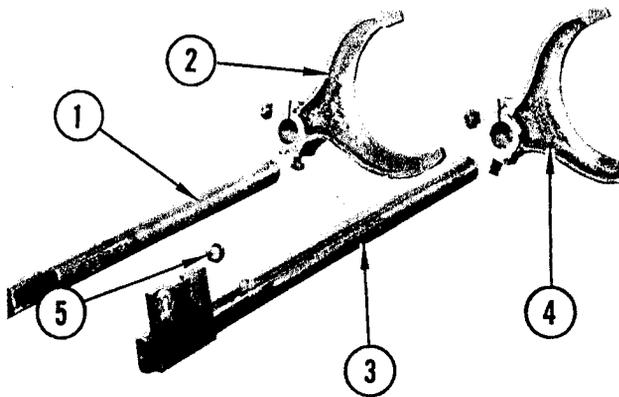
EXPLODED VIEW OF SHIFTER RAILS
